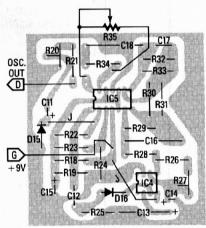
THE SINEWAVE GENERATOR'S parts layout. Nothing is critical.
